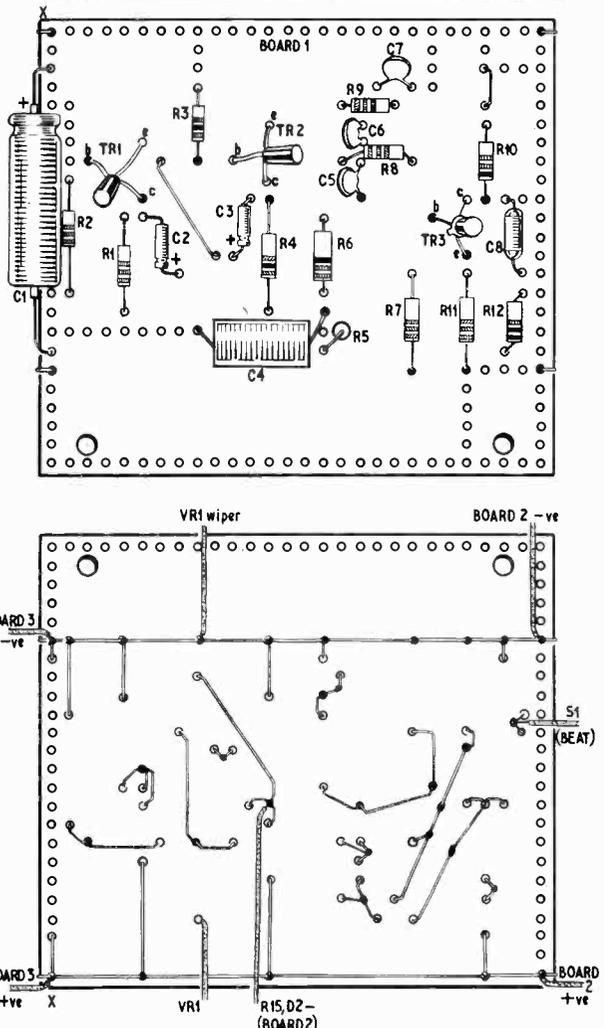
Component assembly and wiring details for tempo generator and beat voicer circuits
